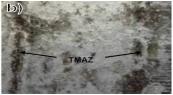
Macroscopical Corrosion features of top surface of weld joint (24hours)
